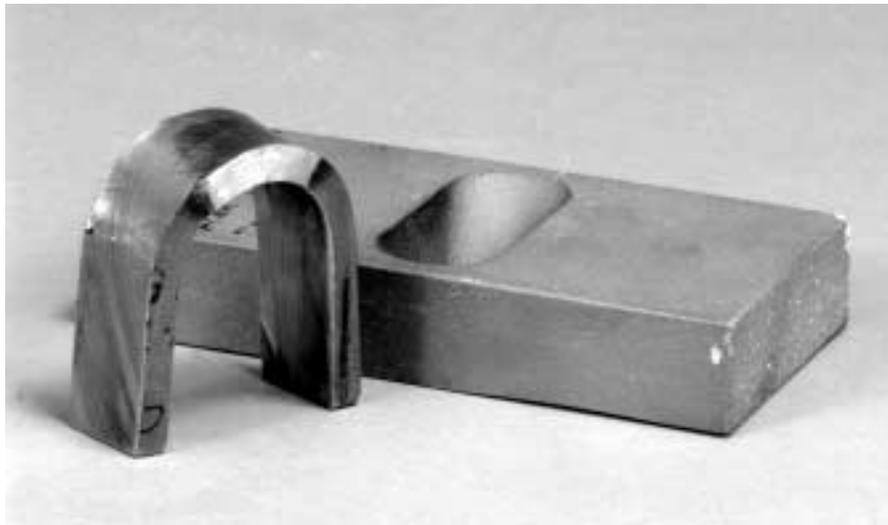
In foundry evaluation, a casting (right) is filled with weld filler, then sliced to yield a bar for bend-testing
